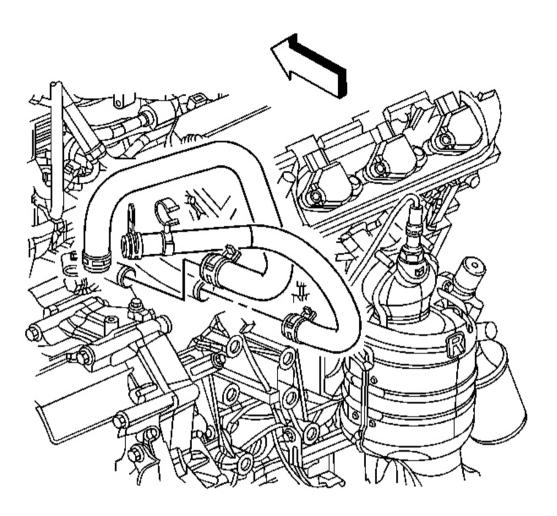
Heater Inlet Hose Clamp & Elbow Fitting Courtesy of GENERAL MOTORS CORP.
